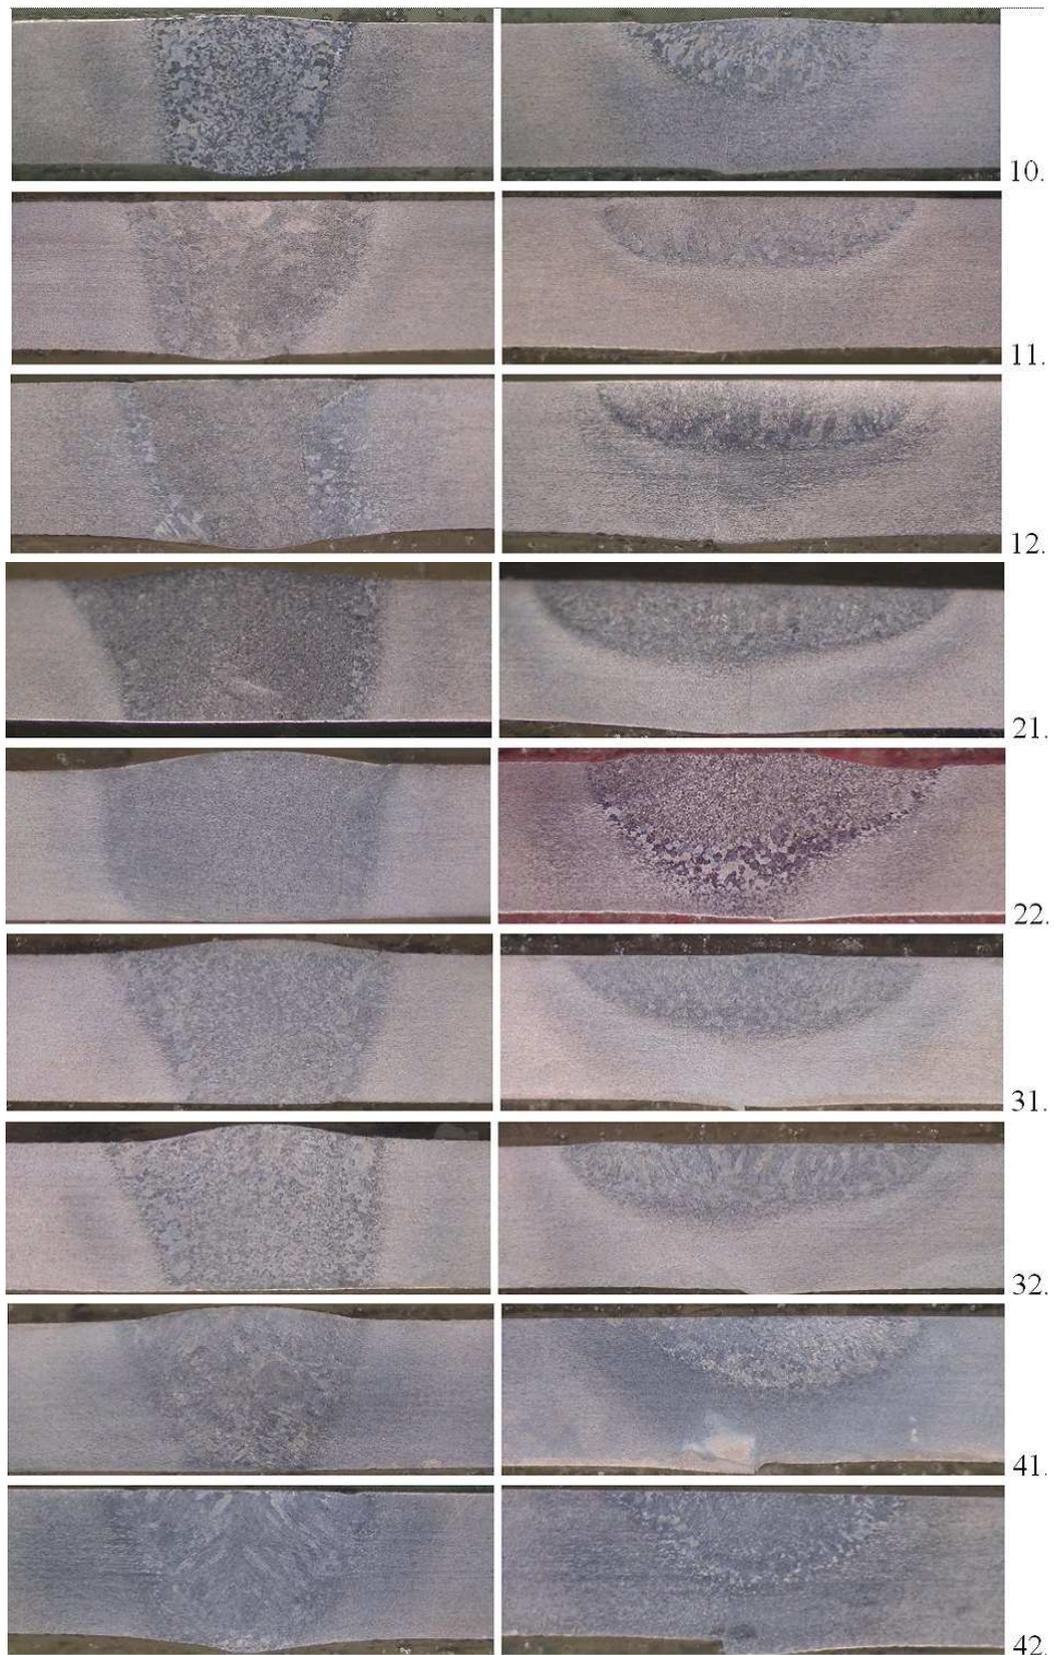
Cross sections of seams welded by ATIG welding (left) and TIG welding (right).
